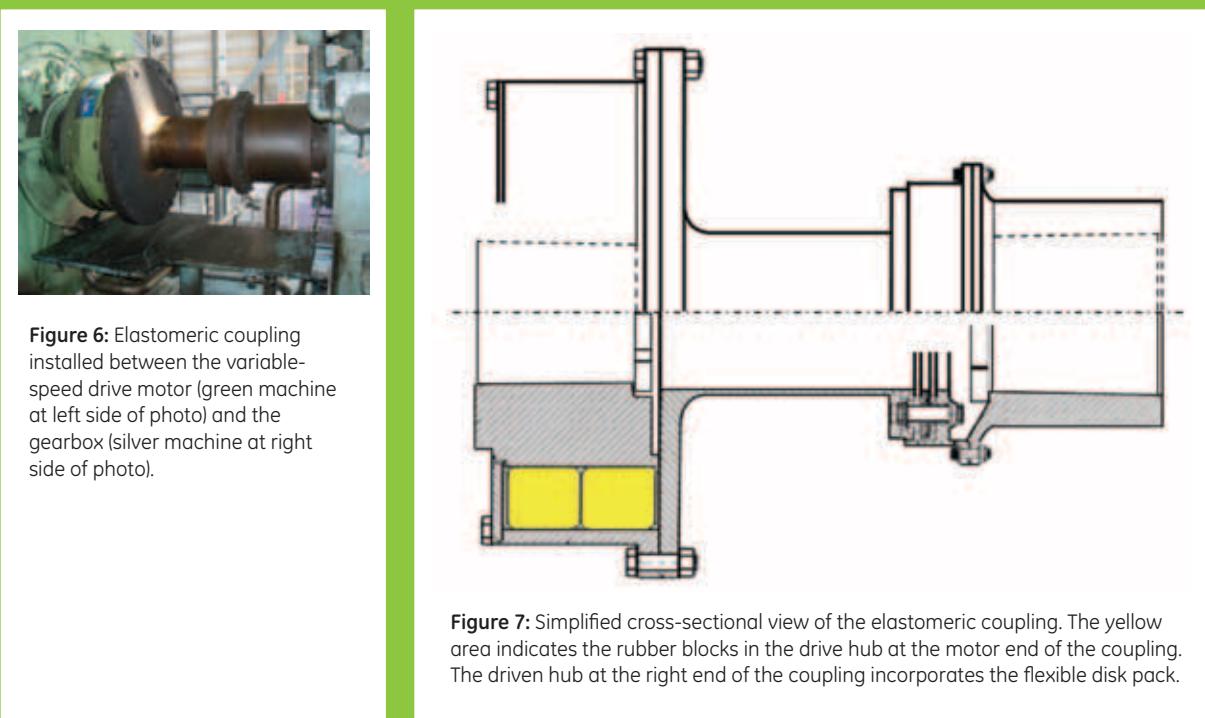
Elastomeric coupling installed between the variable-speed drive motor (green machine at left side of photo) and the gearbox (silver machine at right side of photo).
